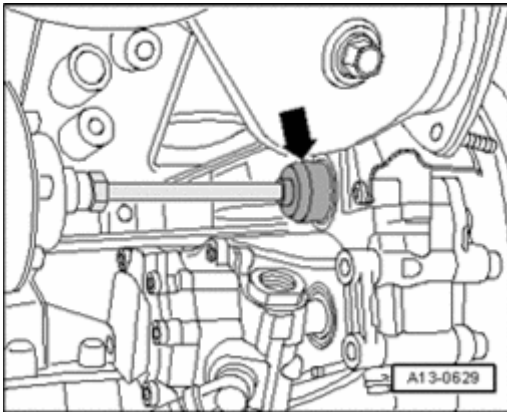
Removing Hose Clamp At A/C Compressor Dust Cap
